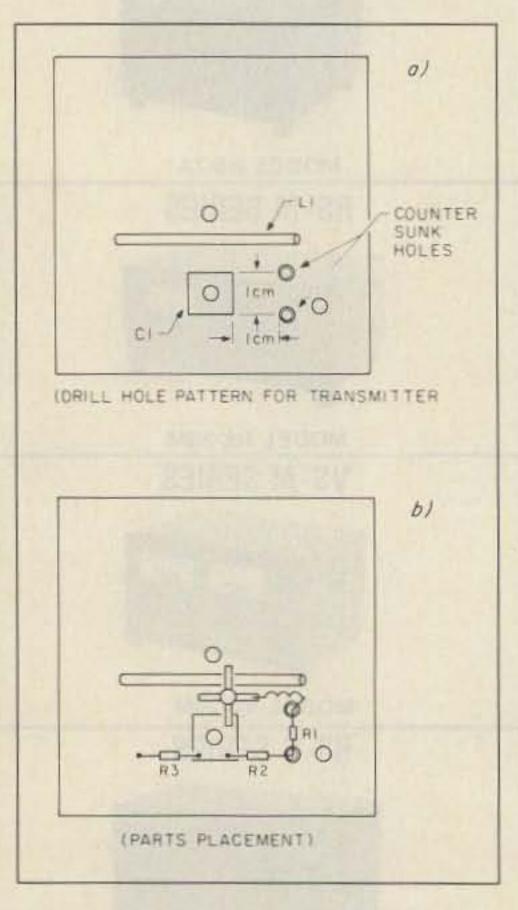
(a) Drilling pattern for the transmitter board. (b) Parts placement.
